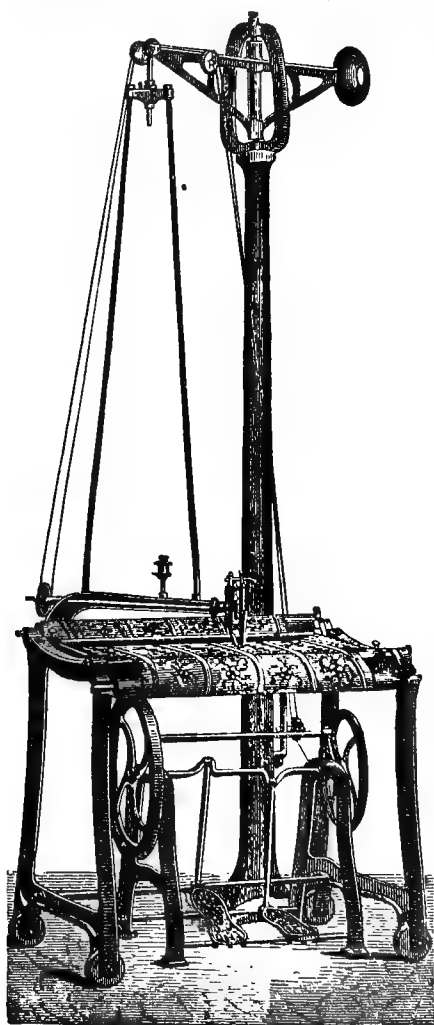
Hurtu & Hautin's embroidering machine. It is formed of two distinct parts: the table or frame that holds the work, and the sewing arm or machine proper, which is suspended from a standard or crane, allowing the whole thing to swing in any direction. Fig. 10 shows this machine.
